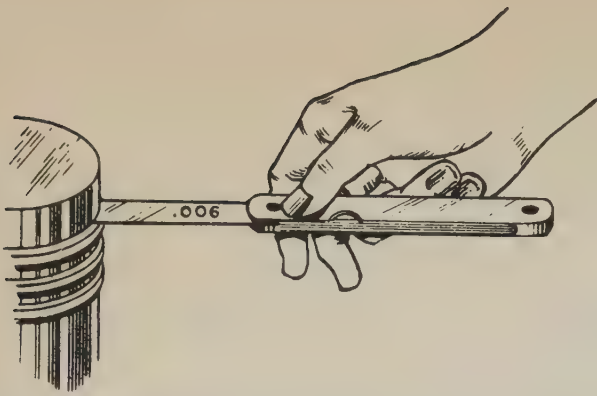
Using a feeler gauge to check the side clearance of the piston ring in the ring groove.
